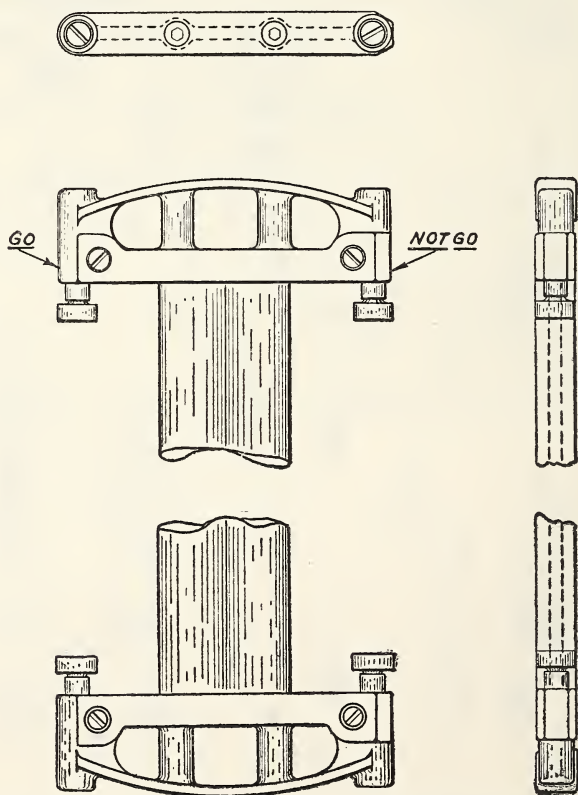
American Gage Design Standard adjustable length gage assembly (double-sided model shown).
